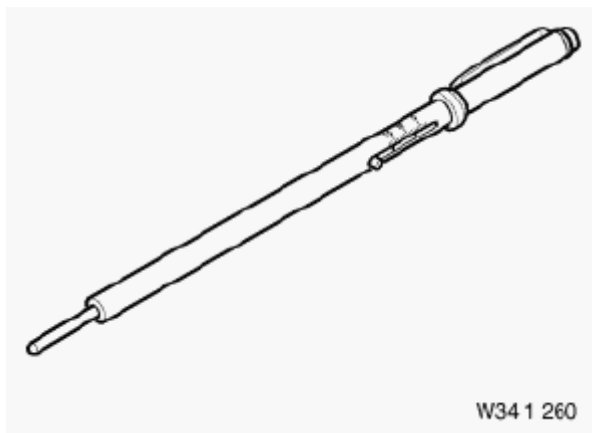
Brake Lining Measuring Gauge (34 1 260)
